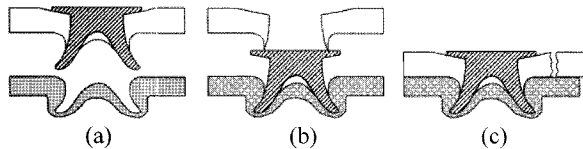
Typical failure modes of SPR joint: (a) rivet tail pull-out; (b) rivet head pull-out; (c) substrate failure.
